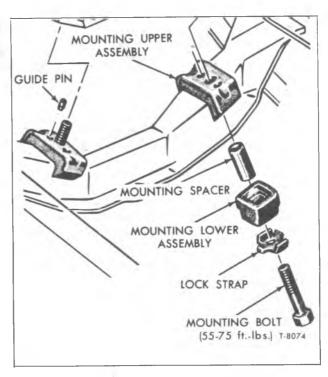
Engine Rear Mounting on Crossmember (CE, CS, ME50 and 60 and TE50)
